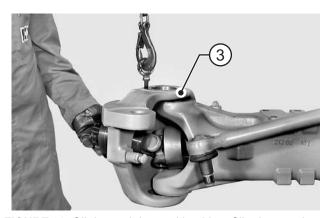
Oil the seal ring and bushing. Slip the steering case (3) onto the twin u-joint and fit the pivot pins and connect the steering bar.
